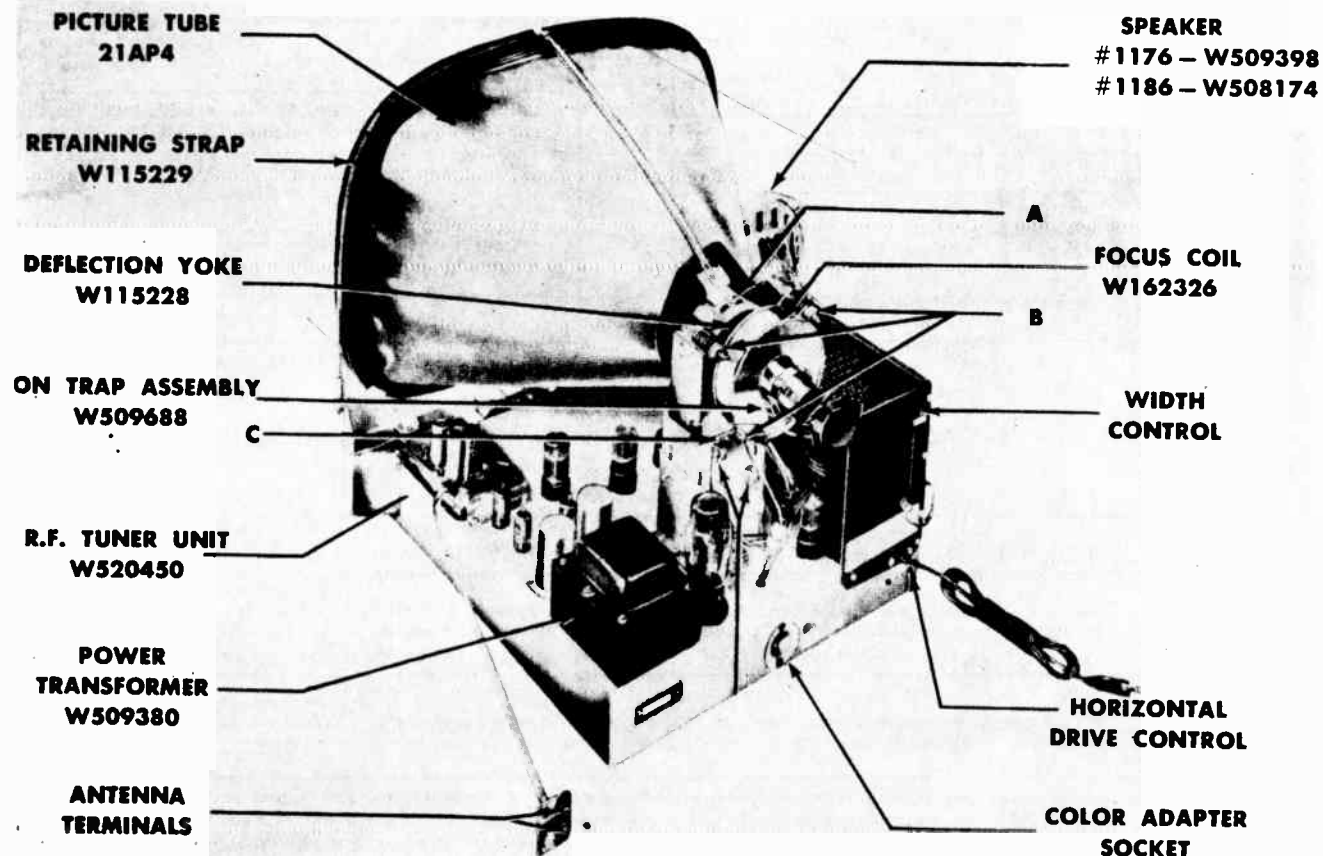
CHASSIS AND PICTURE TUBE ASSEMBLY
